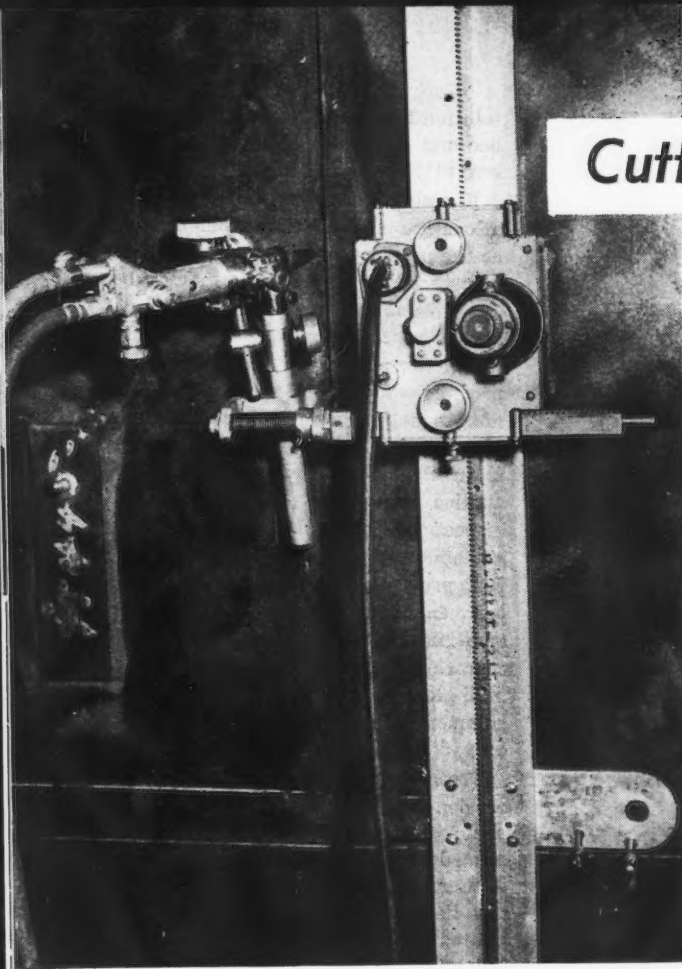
Designed for general purpose cutting, this self-contained burning unit cuts and bevels in one operation. Electrically driven and self-propelled, it travels on a geared aluminum track operating either one or two cutting torches simultaneously. Because it will operate in any position, in line production it is used particularly for cutting upright material as shown or for overhead cuts. It is also used for scribing and fitting uneven surfaces. A pantagraph attachment is available, and motor can be furnished to suit current available. Weight of the complete unit, excluding tracks, is 15 lb.
